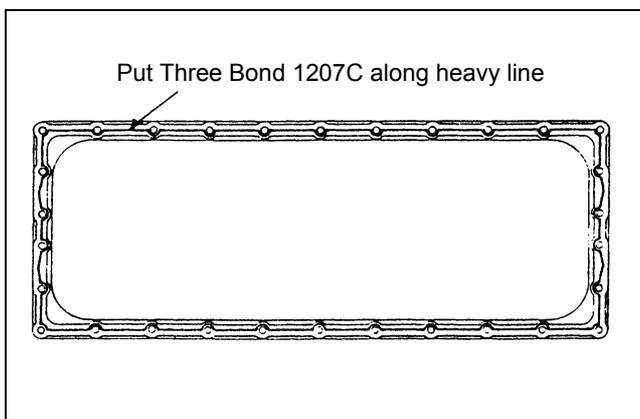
Oil pan flange to be coated with Three Bond 1207C
